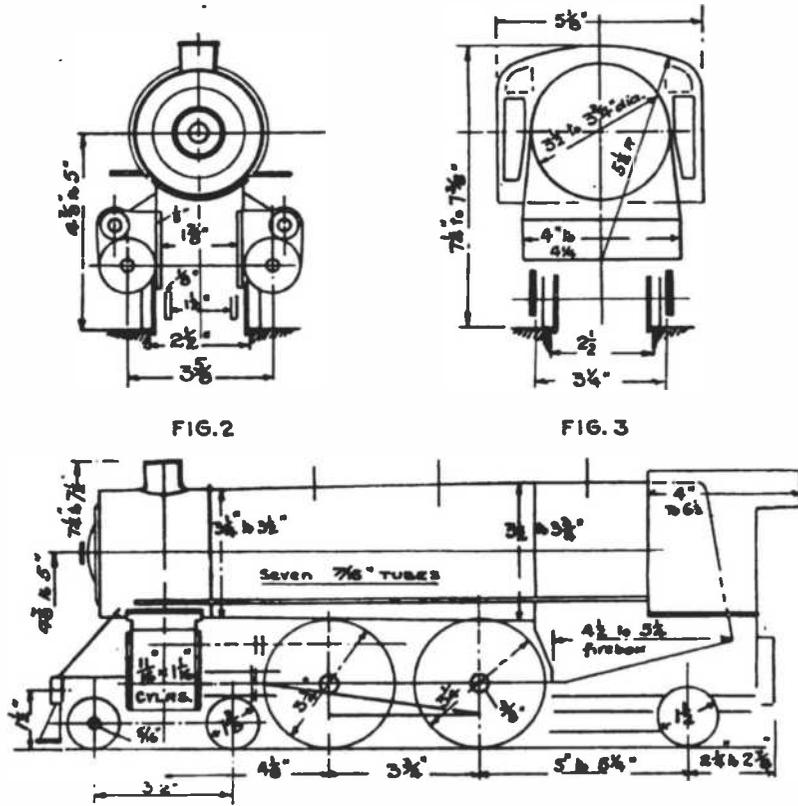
Elevation giving leading standardized dimensions of a half-inch scale 2½ in. gauge loco., Atlantic type. FIG. 2. Front view showing frame width at cylinders. FIG. 3. Rear end giving cab and firebox dimensions.
